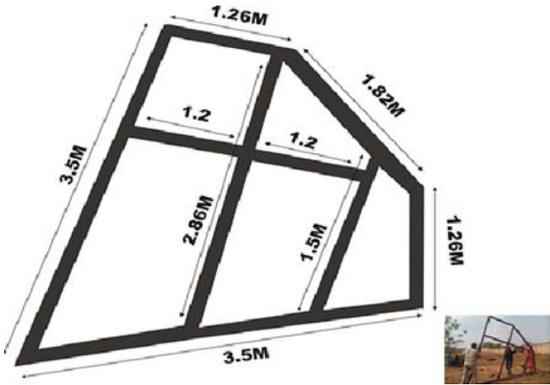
A paper and pencil prototype of the Mould base showing the dimensions
